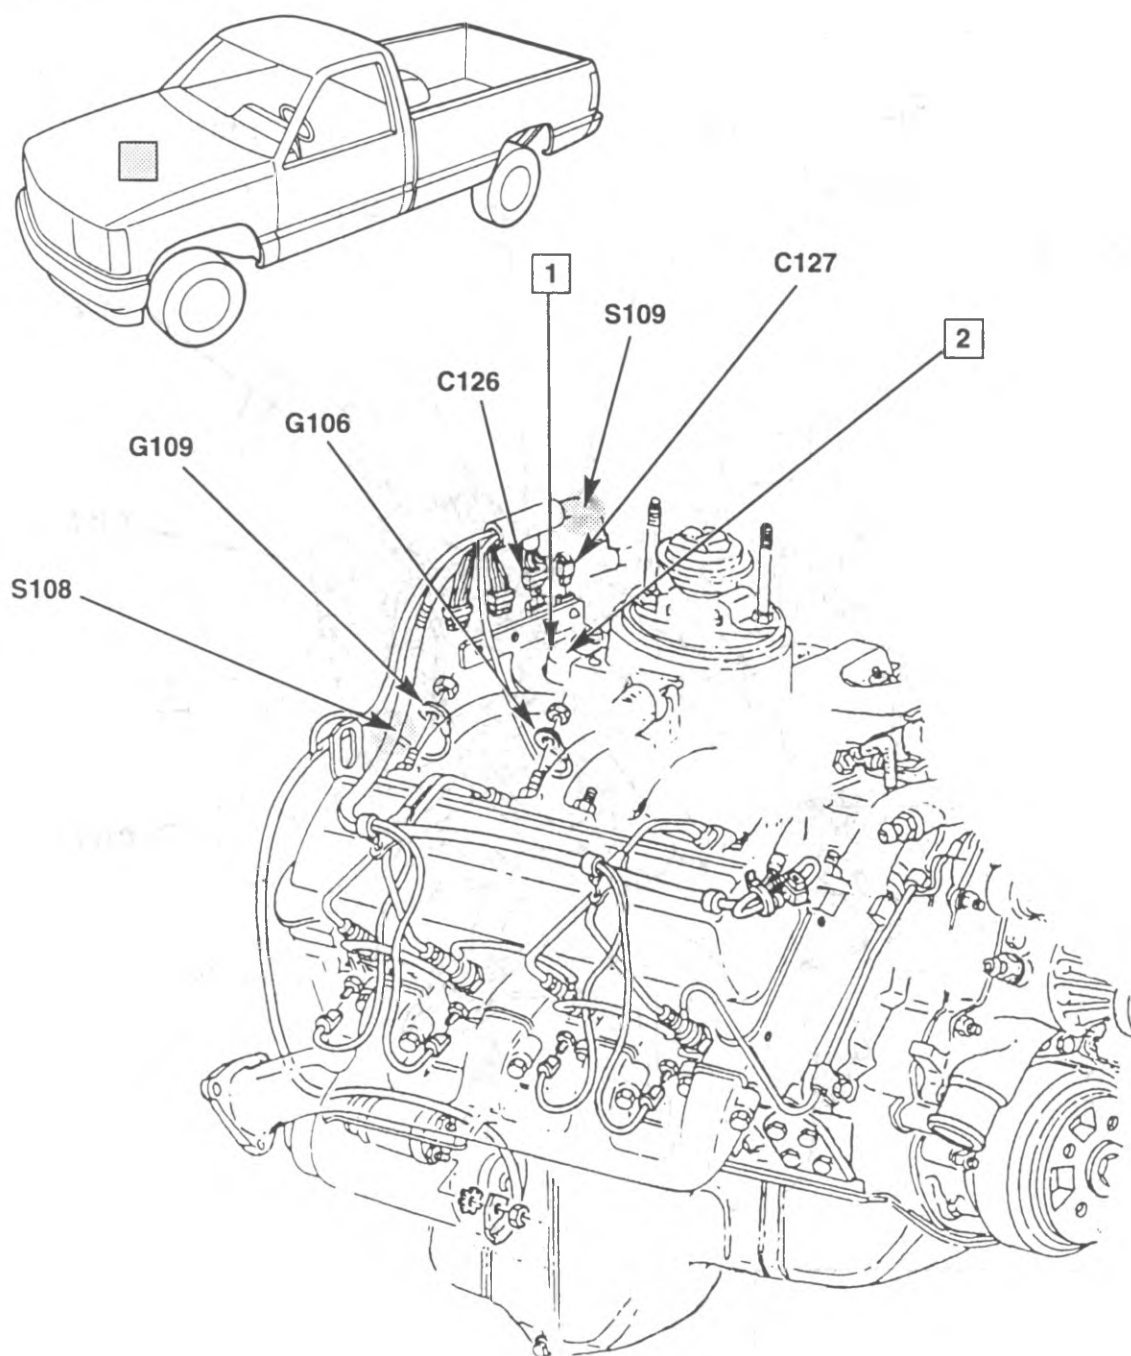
6.5L Diesel Engine Wiring, RH Side
